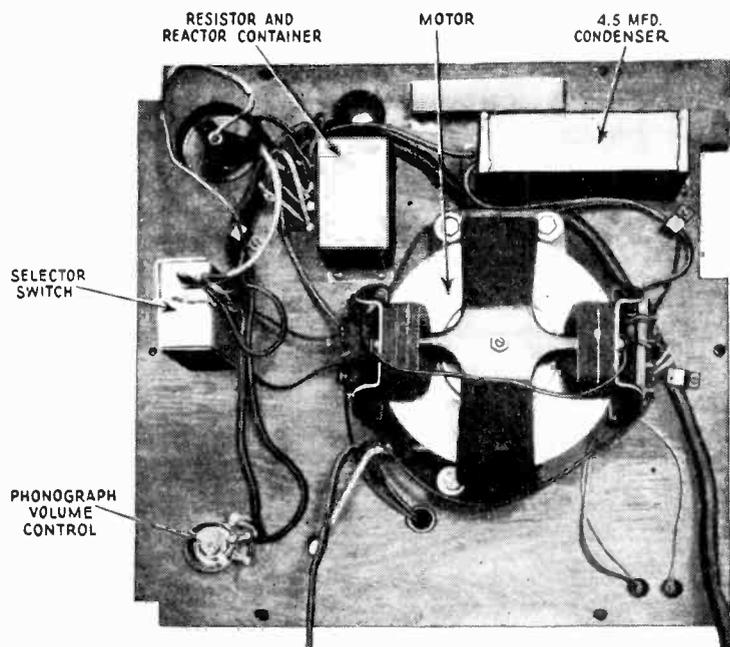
Bottom view of the phonograph motor mounting board, showing various parts.
